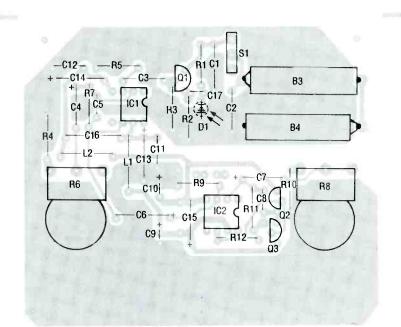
RECEIVER PARTS-PLACEMENT DIAGRAM.
